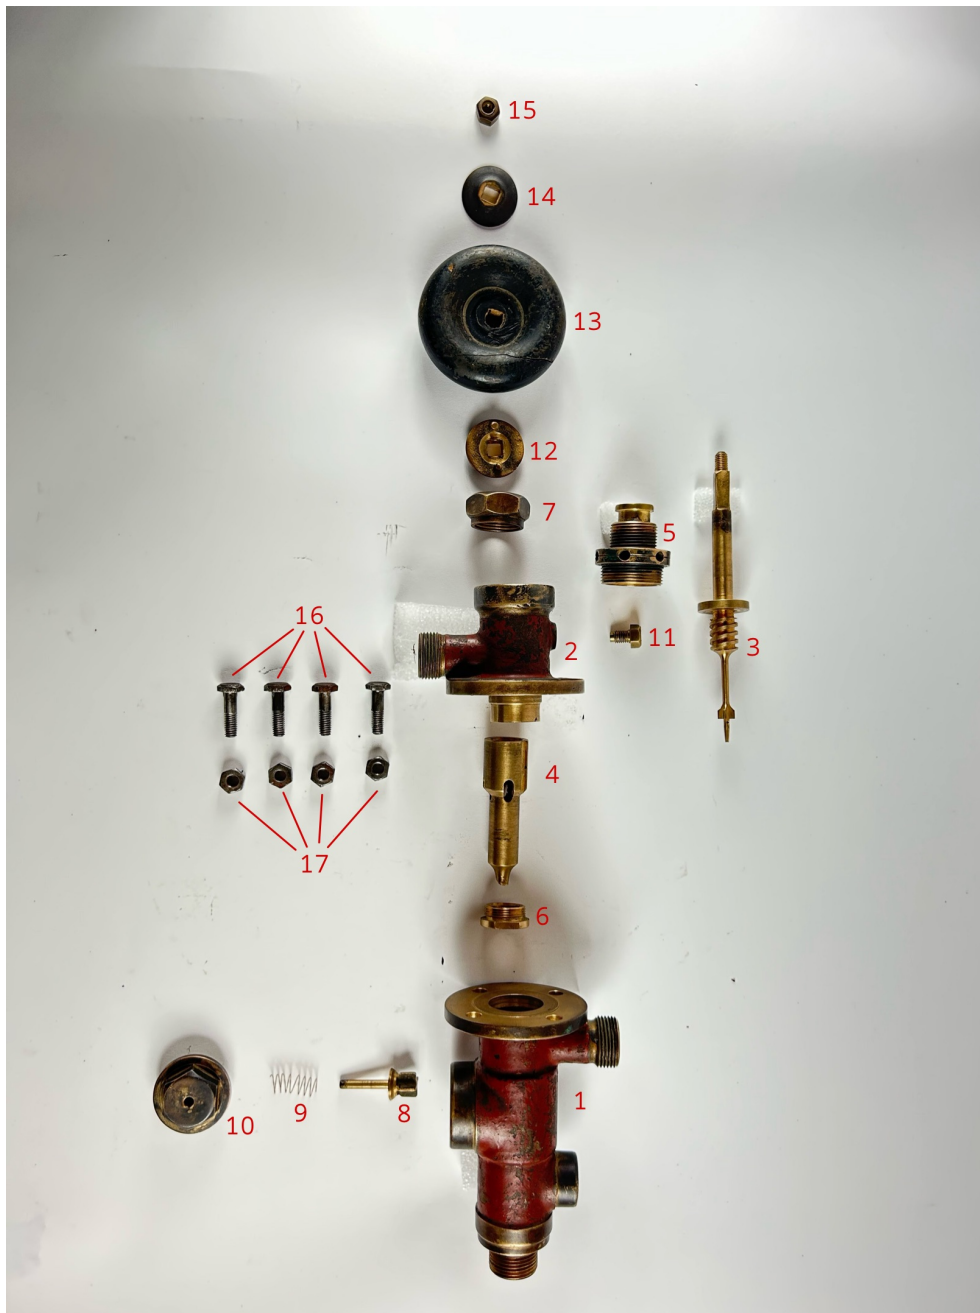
Exploded view of the removable parts of the injector . 1. Lower body 2. Upper body 3. Spindle 4. Steam nozzle 5. Upper stuffing box 6. Lower stuffing box 7. Upper stuffing box nut 8. Overflow valve 9. Overflow spring 10. Overflow nut 11. Positioning screw 12. Lower regulating wheel positioner 13. Regulating wheel 14. Upper regulating wheel positioner 15. Regulating wheel nut 16. Flange screws 17. Flange nuts
